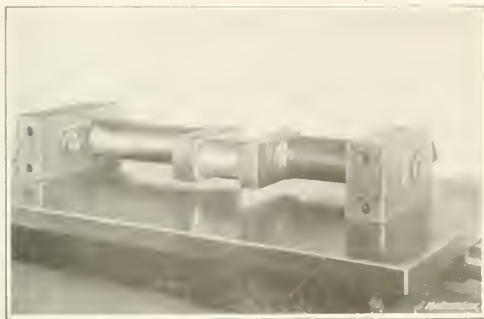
Setting Dogs on Crankshaft ready for Turning Operation
